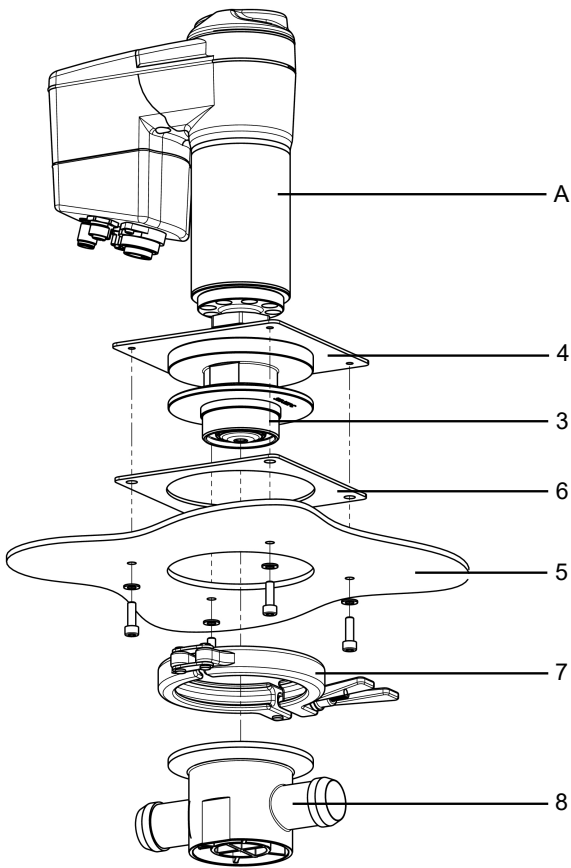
Assembling the pneumatic stainless steel actuator in the housing
